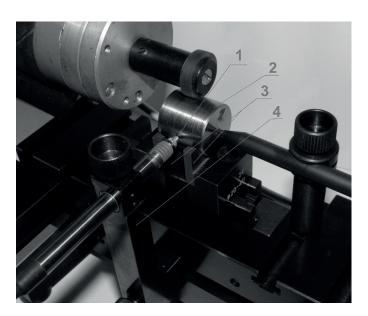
Measuring device ROL-2: 1 – measuring sensor, 2 – workpiece, 3 – V-blocks, 4 – sensor holder
